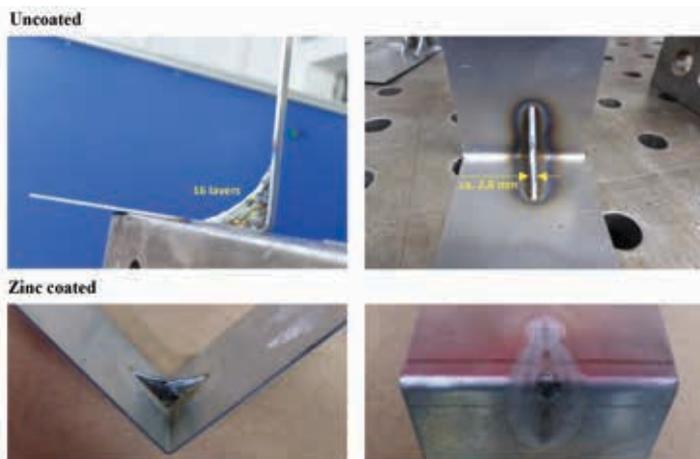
Welding results of additive manufacturing of a gusset plate on steel sheets of 2.0 mm thickness. Above, uncoated. Below, zinc coated.
